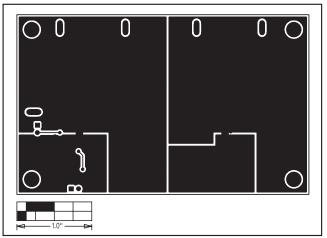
MAX1846 EV Kit PCB Layout—Solder Side
